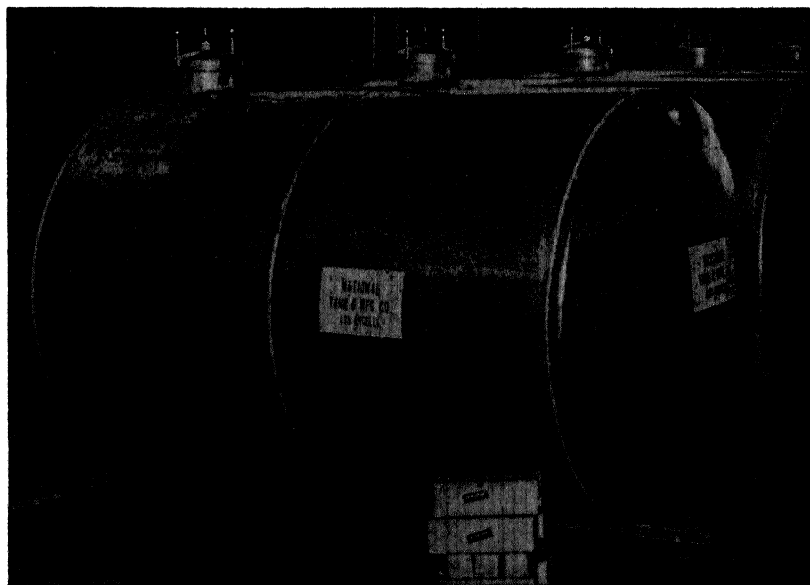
Aluminum tanks of arc welded construction used for storing olive oil.
